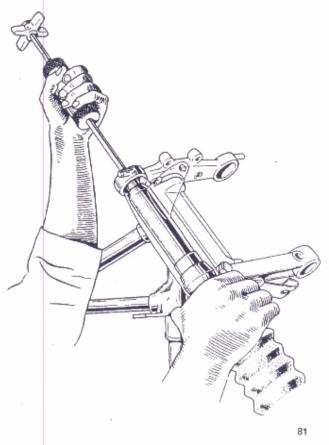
Reassembling the telescopic fork, using service tool No. Z161
